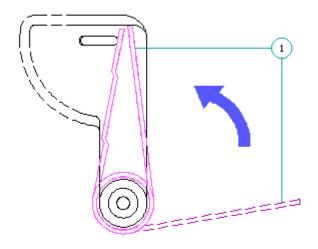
Compressing the Spring on the Guide (Power Switch Side)
